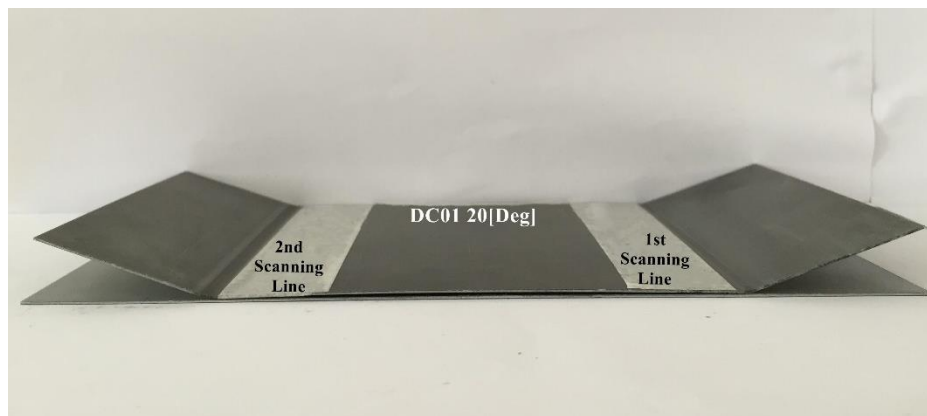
Mild steel DC01 final formed “U” shape component with 20° bending angle
